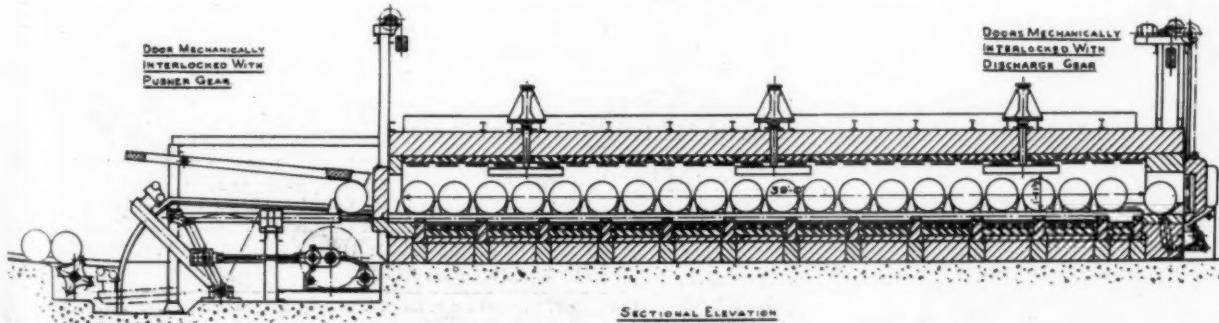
Automatic conveyer furnace for preheating aluminium alloy billets 20 in. diameter and 48 in. long for extrusion. Two rows of billets are automatically charged, and the furnace has an output of 3 tons per hour.
